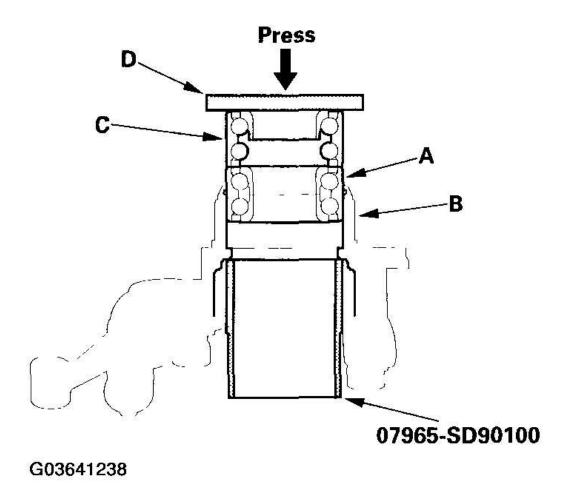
Pressing New Wheel Bearing Into Knuckle Courtesy of AMERICAN HONDA MOTOR CO., INC.
